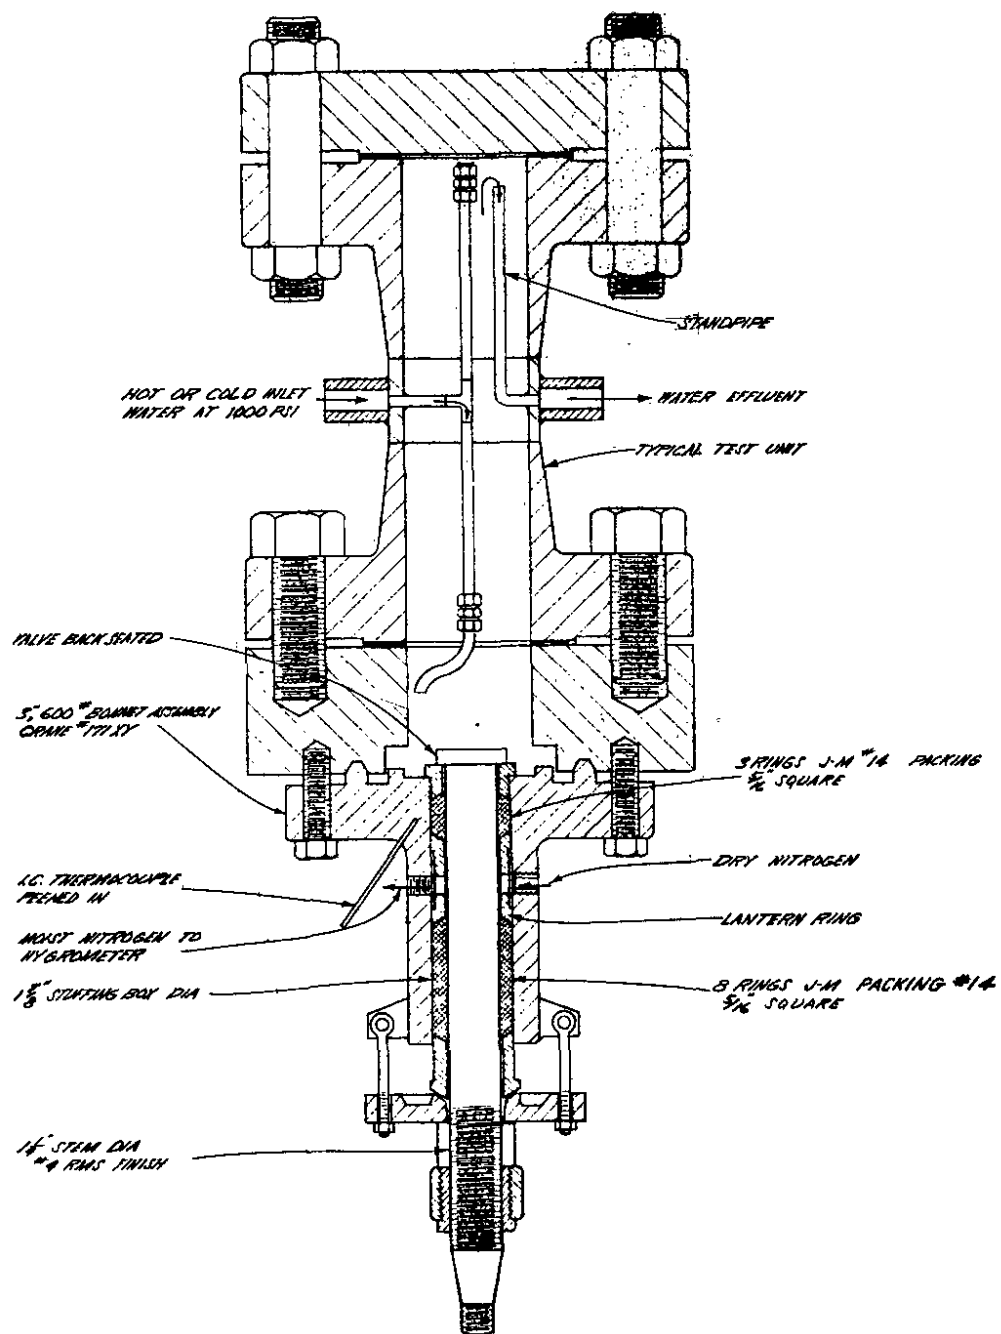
VALVE STEM LEAKAGE TEST: 3-INCH, 600-LB GLOBE VALVE
